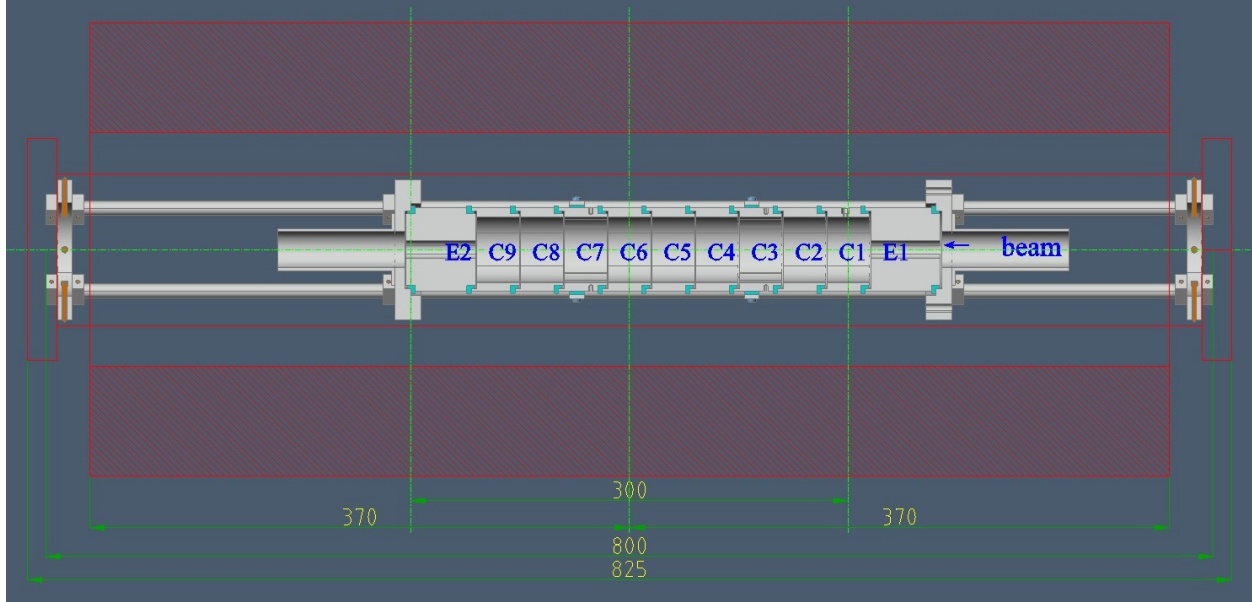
Cross sectional drawing of the stacker electrode tower. Magnet and vacuum chamber are sketched in red for reference. All dimensions in millimeters.
